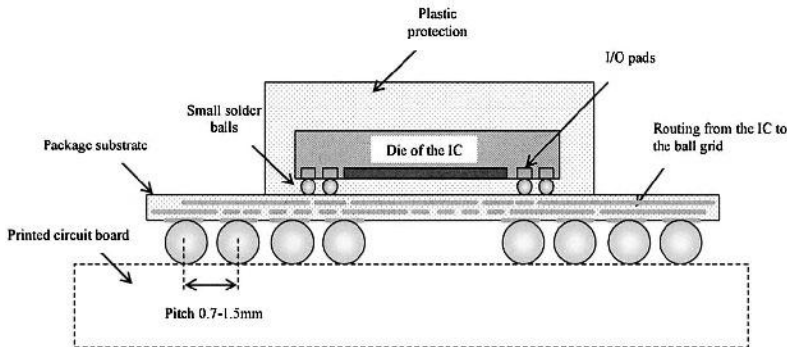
The die is attached to the package using micro balls, then the package is linked to the PCB via solder balls to the printed circuit board (BGA).
